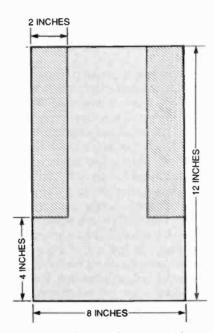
Use this template as a guide when cutting the two boards for use in the Mount.
